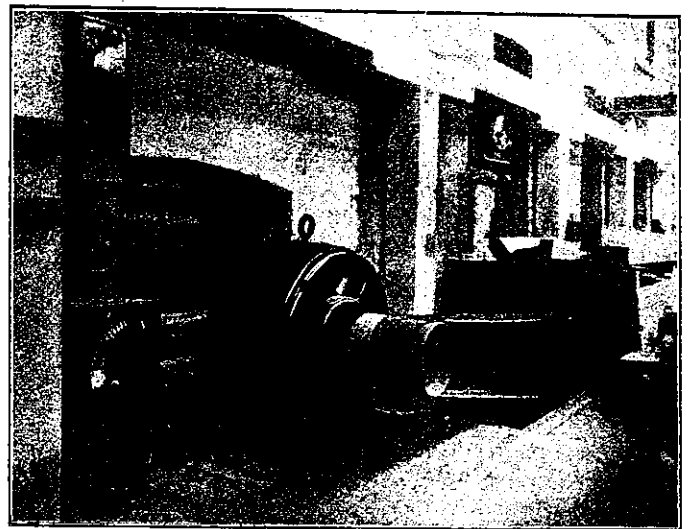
A 60 H.P. MOTOR DRIVING LOG FRAMES AND OTHER MACHINERY
